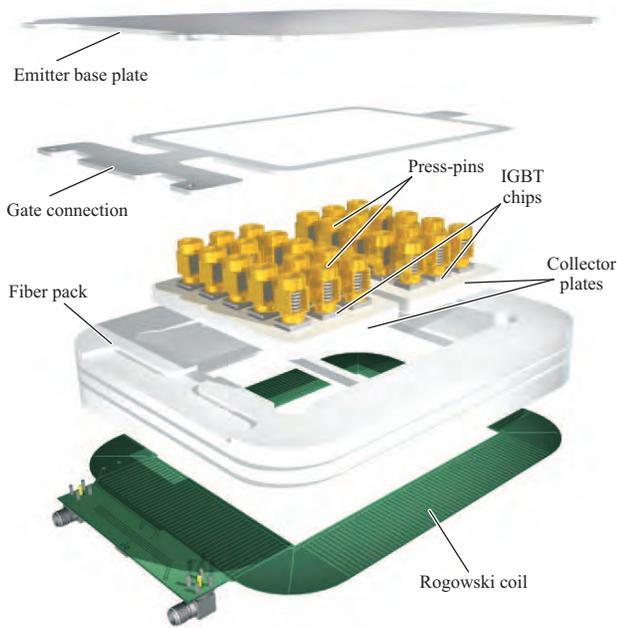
Explode 3D CAD drawing of the PP IGBT showing the module's internal chips and housing.
